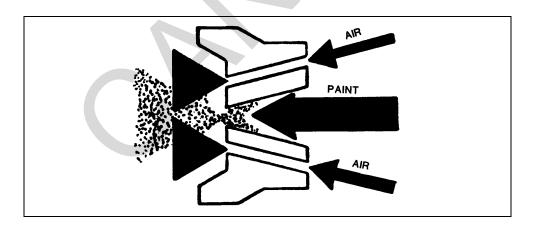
Cross-Sectional Drawing of Nozzle of Air-Spray Gun
